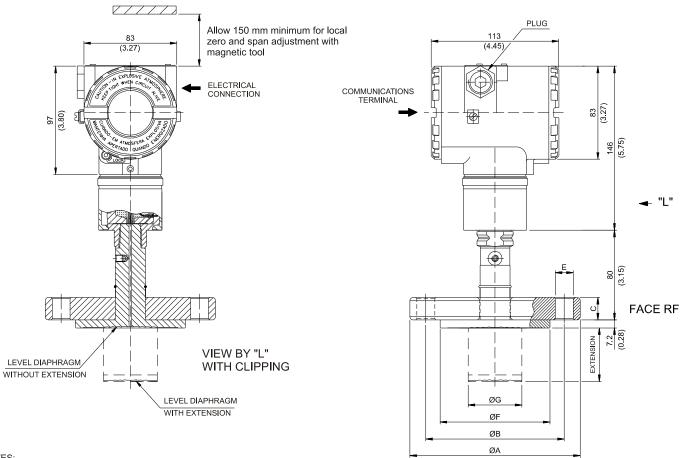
(b) – Dimensional Drawing and Mounting Position for LD291 - Sanitary
